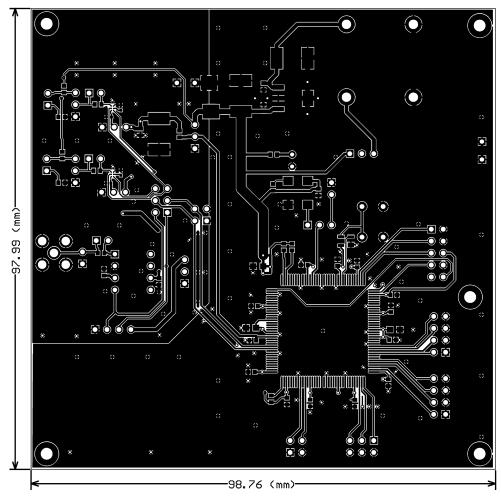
Top Layer LMV1022 / LMV1023 Demo Board
